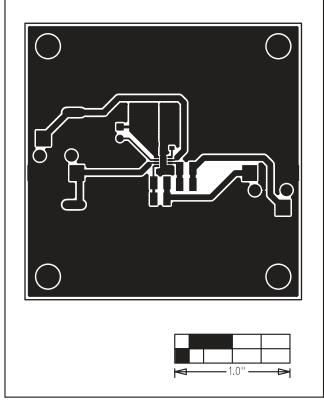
MAX9890 EV Kit PCB Layout—Component Side
